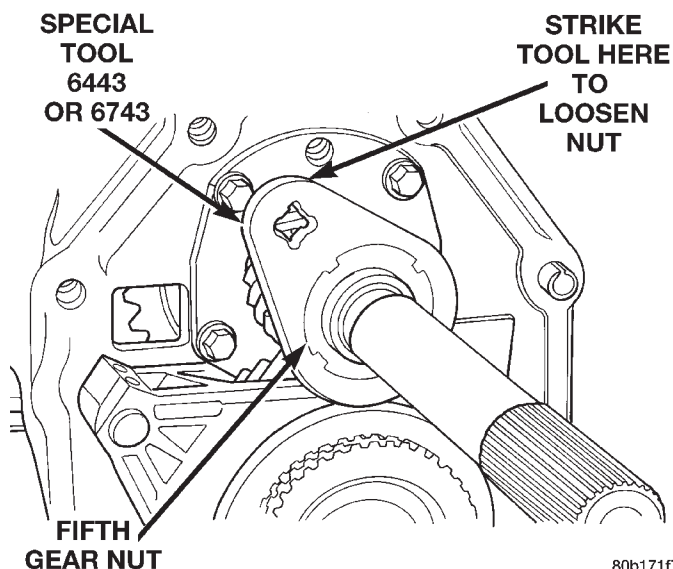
Installing Nut Wrench On Mainshaft Fifth Gear
